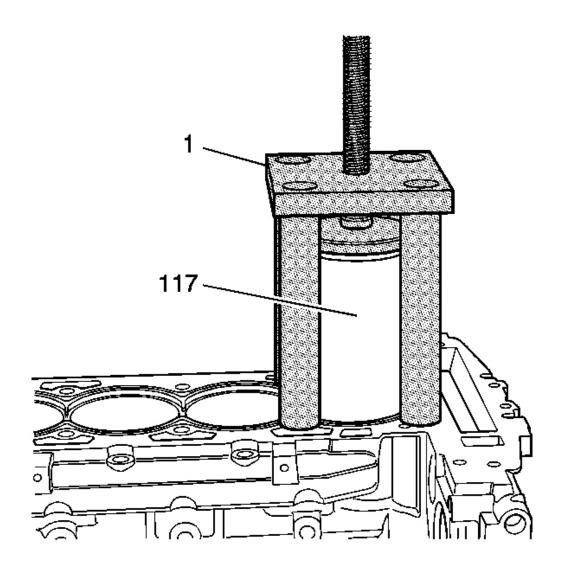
View Of Cylinder Bore Sleeve Fixture Courtesy of GENERAL MOTORS CORP.
